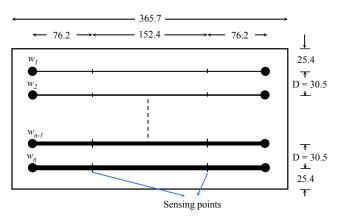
Test board configuration in IPC-TM-650, method 2.5.4.1a (unit: mm)
